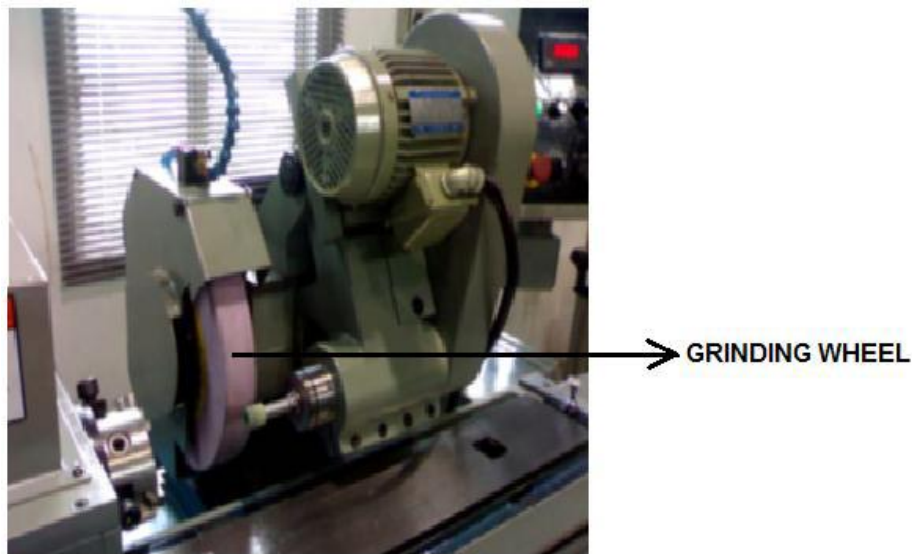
The Grinding Wheel Head on cylindrical grinding machine Source: GTDMC Machining *EXTOMAX* (OCD-3260)
